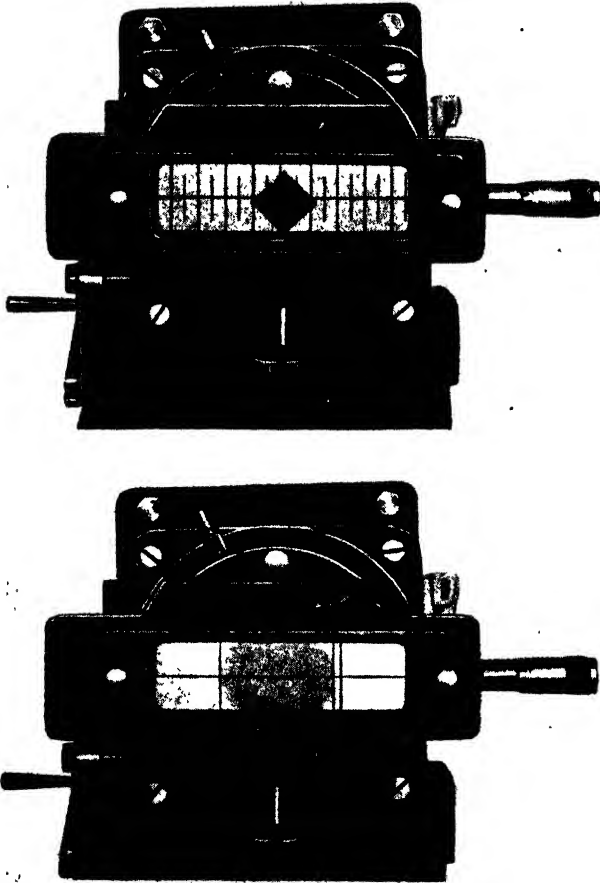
ENLARGED IMPRESSIONS OF INDENTATIONS ON EDGWICK MACHINE
